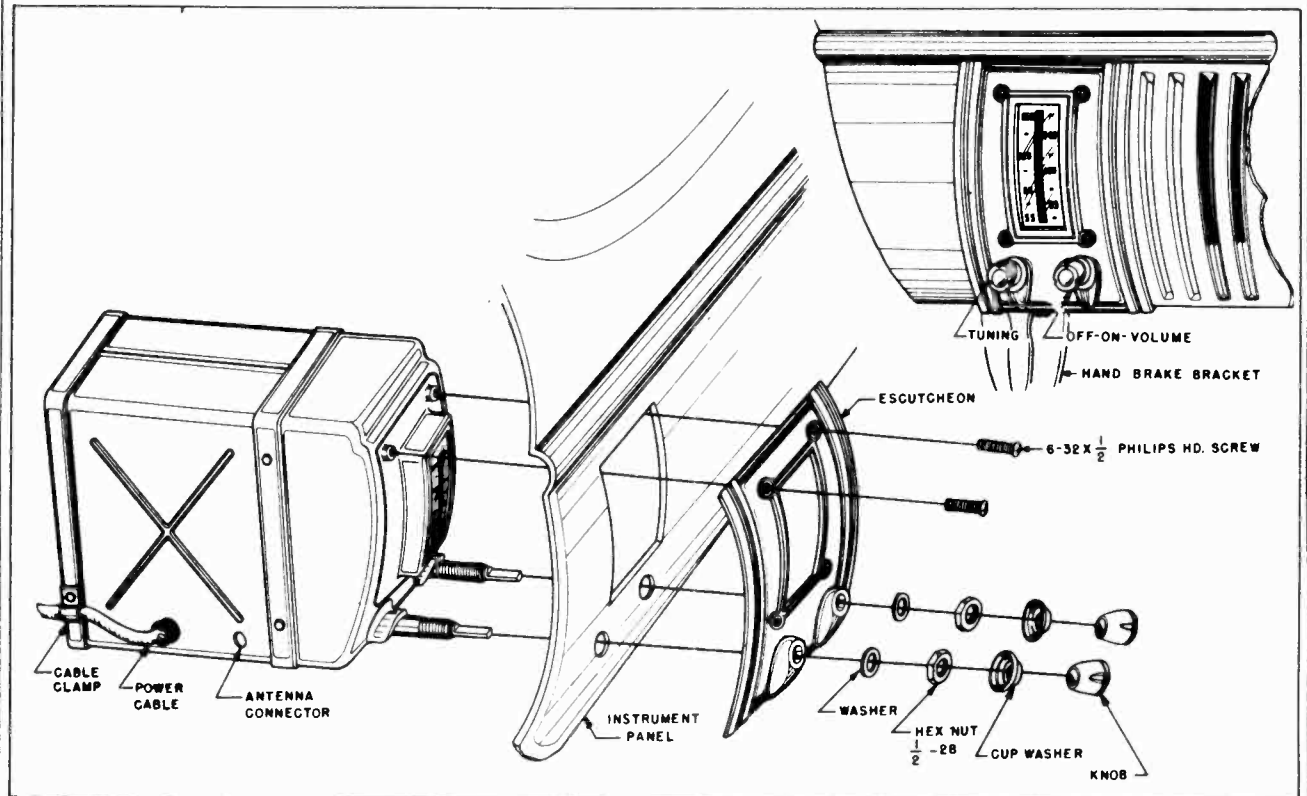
R.F. TUNING UNIT DETAIL MOUNTING ASSEMBLY
